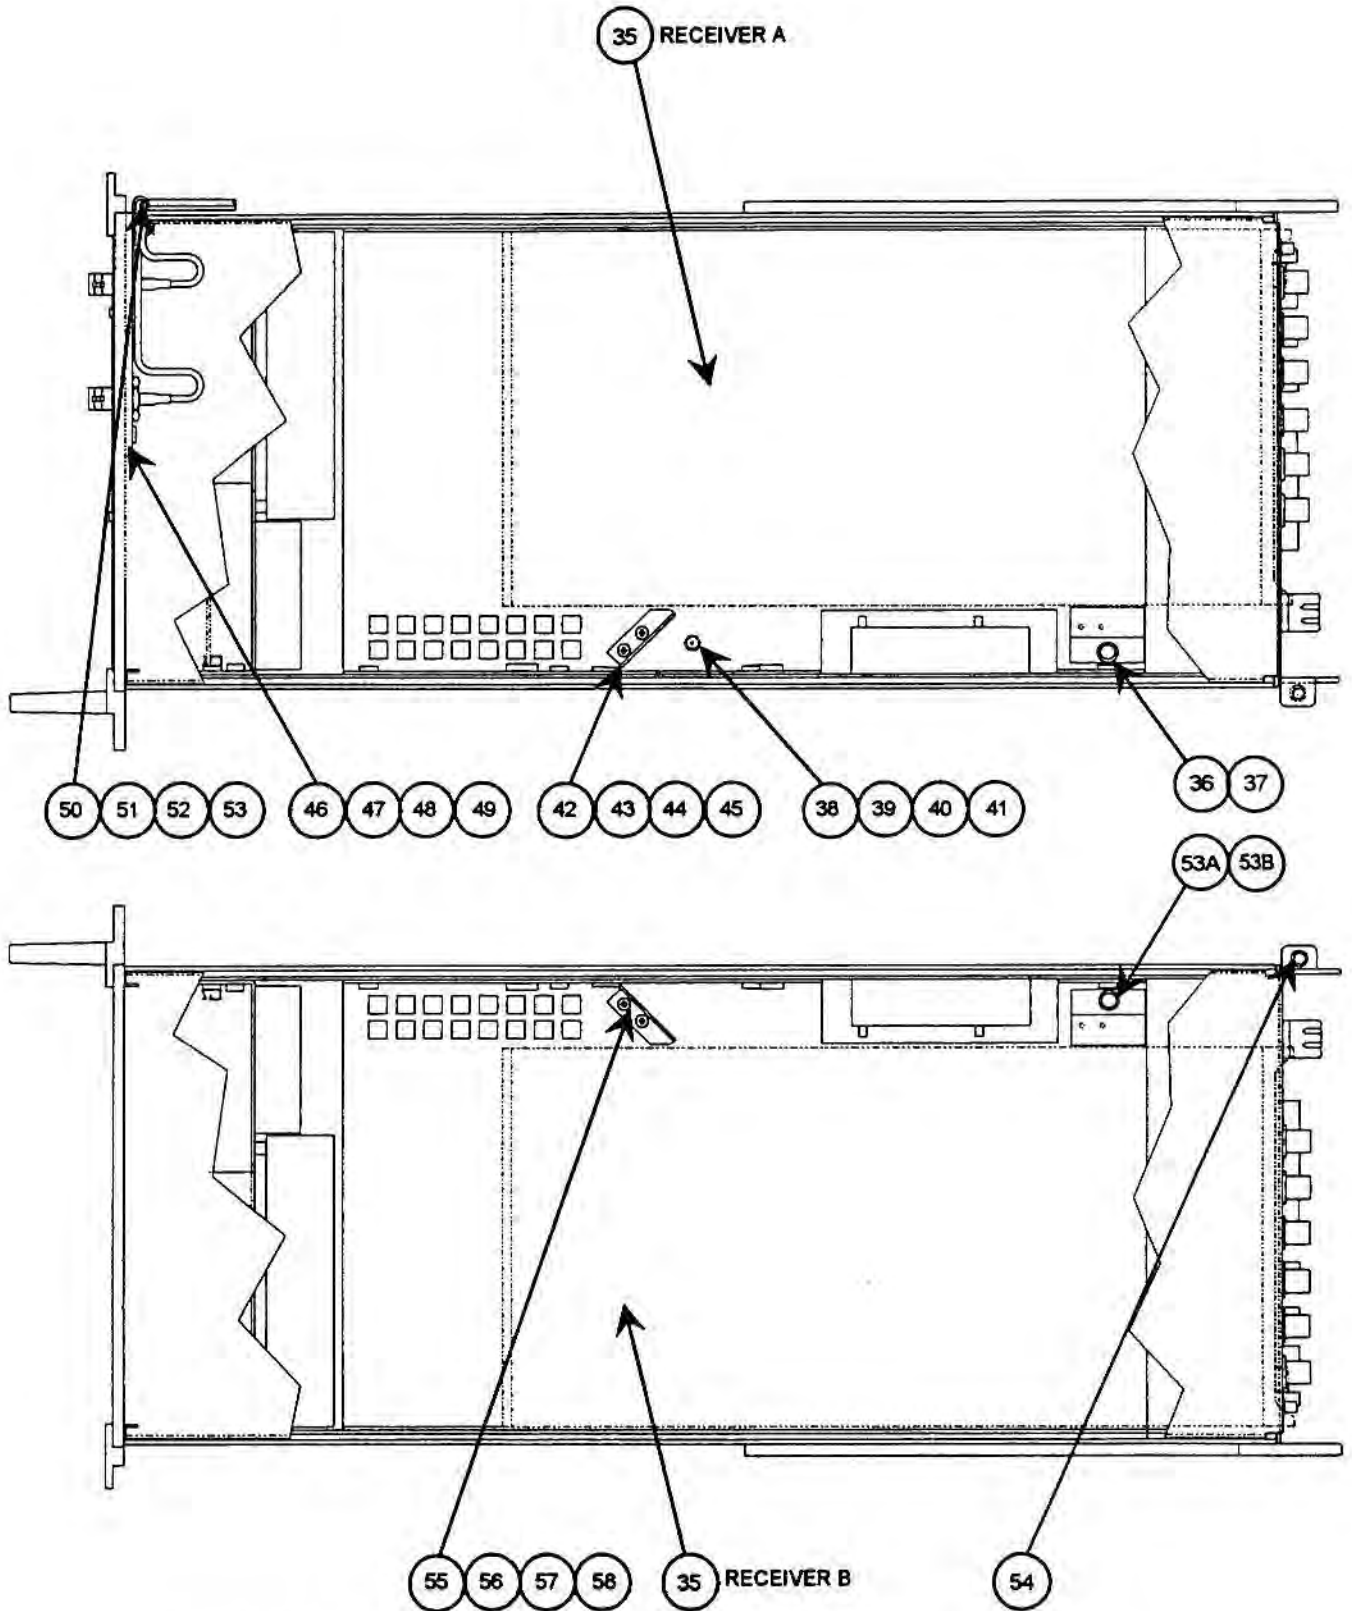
WJ-9902-2 Receiver Controller Assembly Parts Location
